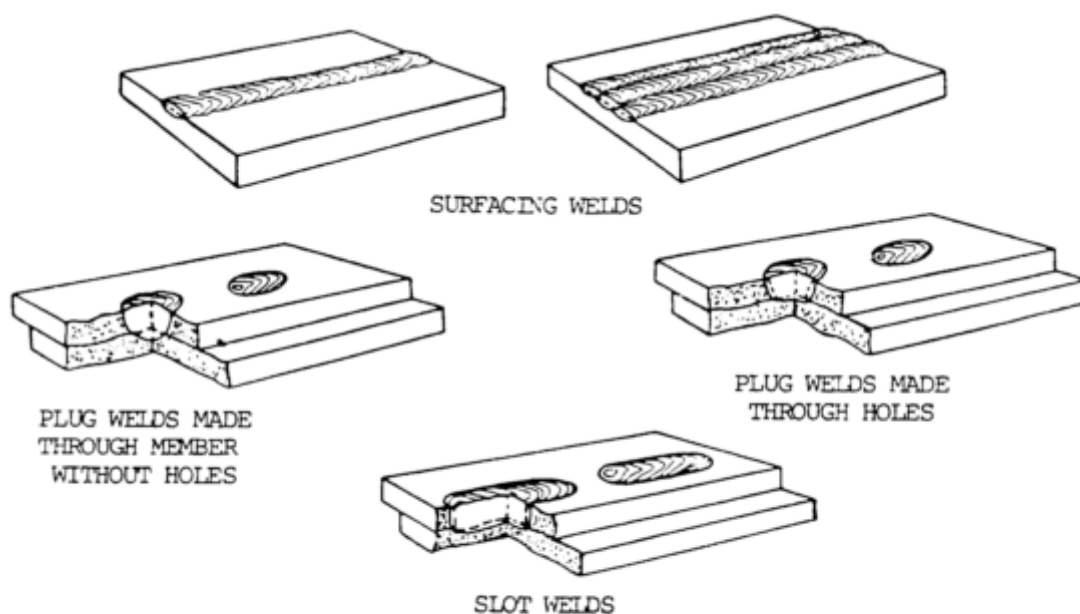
Surfacing, plug, and slot welds.
